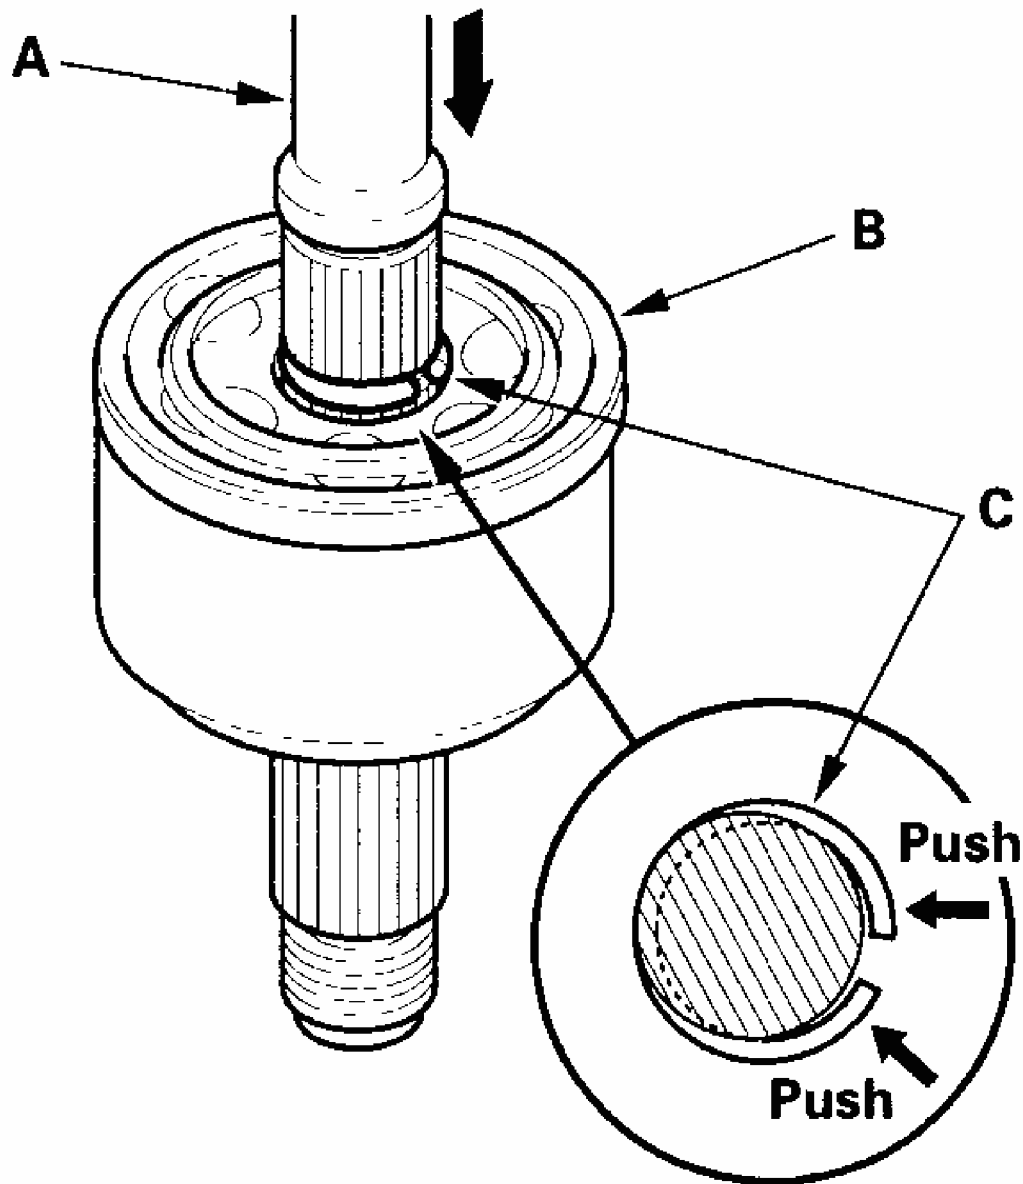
Installing New Stop Ring In Driveshaft Groove
